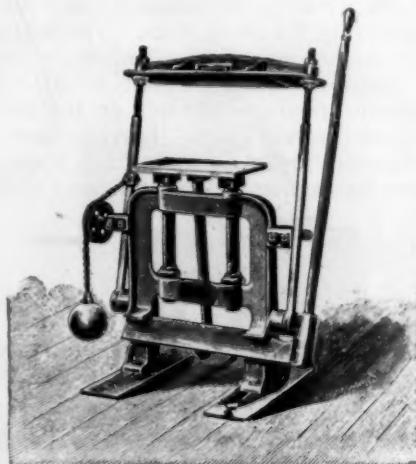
THE FIRST REYNOLDS MACHINE.
